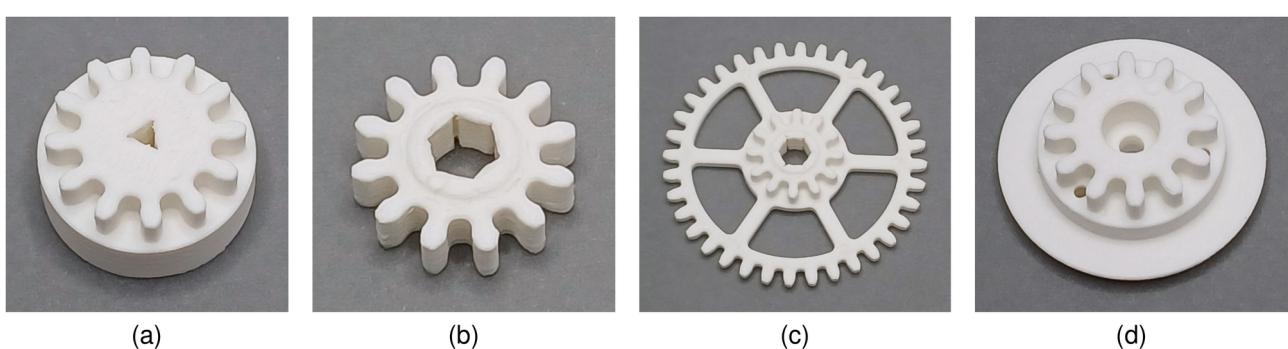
Gears. (a) Motor gear. (b) Connecting gear. (c) Compound gear. (d) Output shaft with gear.
